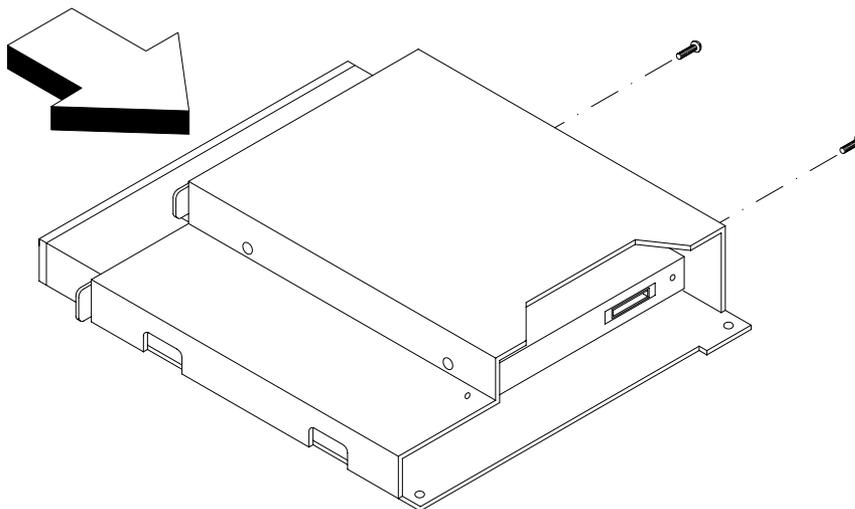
Installing the CD-ROM Drive into the Drive Module
